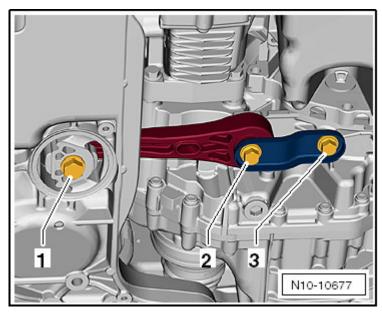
Identifying Support Bracket, Pendulum And Bolts Courtesy of AUDI OF AMERICA, LLC
